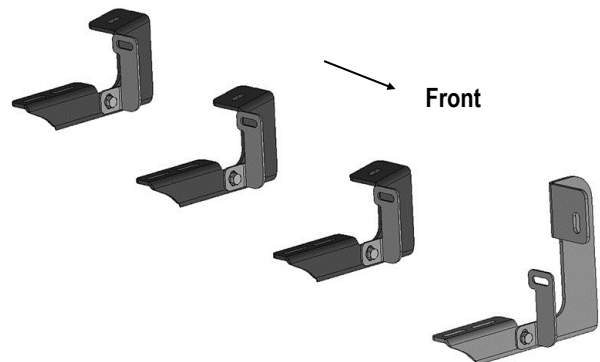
Passenger Side 2nd & 3rd & 4th Mounting Locations
